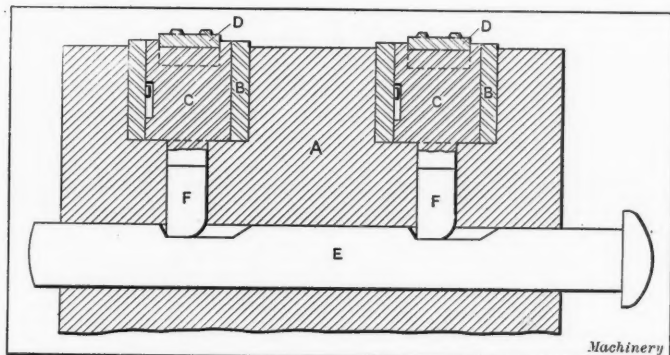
Section of Turret showing Type Ejecting Mechanism
